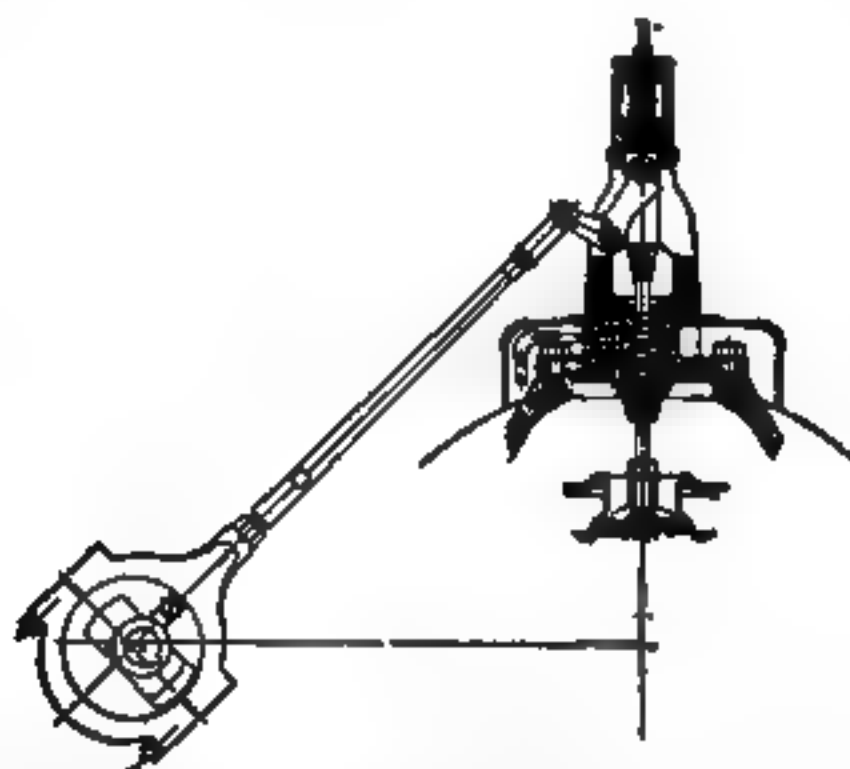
,083.—Sectional elevation of valve gear of Lentz engine. The valve is of the double seat poppet type, with seats not more than one-eighth inch wide. The valve stems which are ground to fit the long bushings shown have no stuffing boxes, the fit being to .001 inch. Grooves are turned in the spindles to prevent leakage. The valves are turned to such diameters that the lower one will just pass through the upper opening. No dash pots are used. The valve is moved by a cam acting on a roller. When the valve is seated the cam is not in contact with the roller, but the amount of clearance is too small to be seen in the cut. The roller is always in contact with the cam until the valve is seated.
